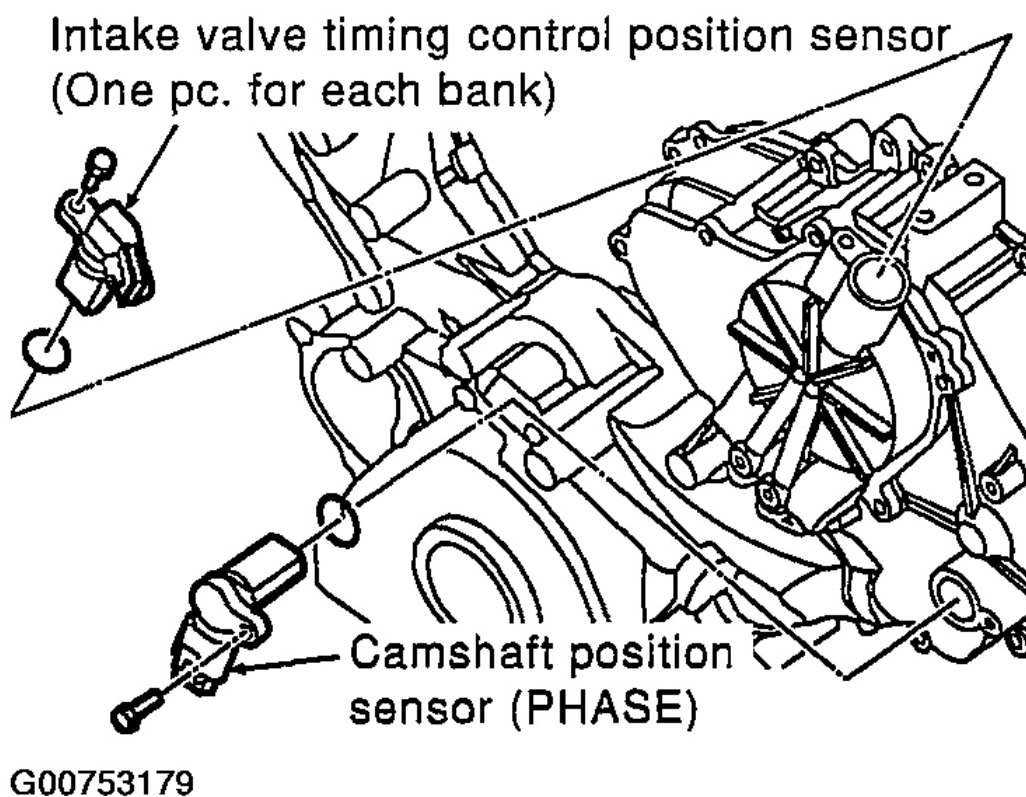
Locating Intake Valve Timing Control Position Sensor & Camshaft Position Sensor (PHASE)
